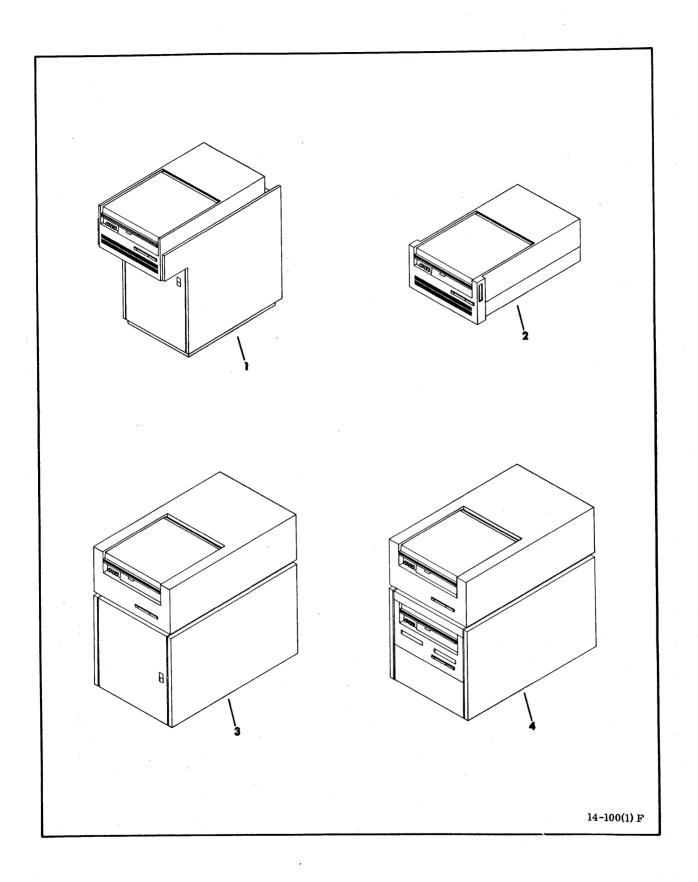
Final Assembly (Sheet 1 of 2) 83322150 W
